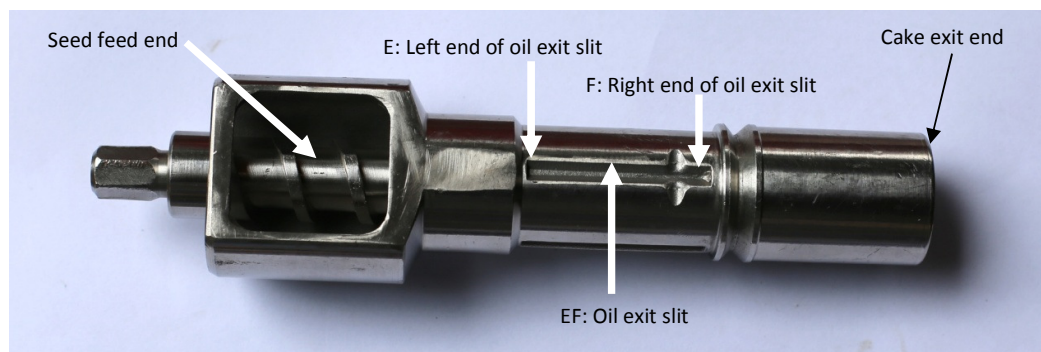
Photograph of the screw placed within the barrel of the domestic-scale screw expeller (DSE). Seed feed end, cake exit end and the oil exit slit are shown.
